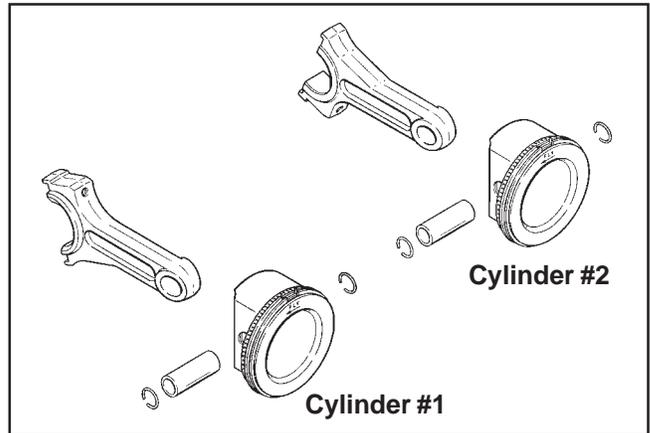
Piston, Connecting Rod and End Cap Detail.
